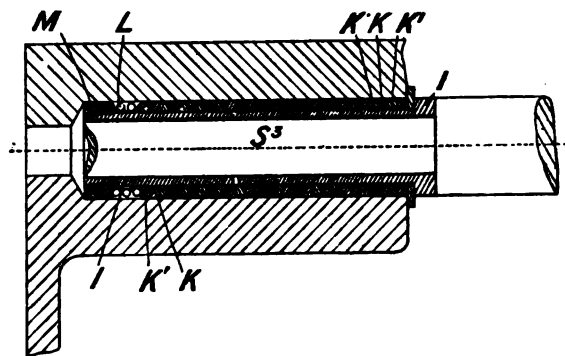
Bearing for Spindle in Early Parsons Turbine.
